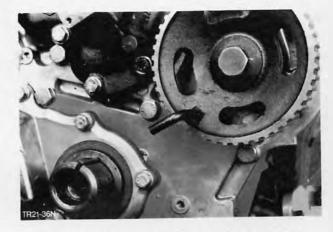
Lock camshaft toothed belt gear using Special Tool 21–016
